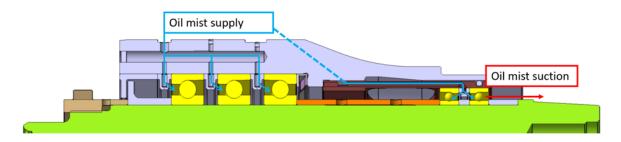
Oil mist lubrication method, oil mist supply is colored in blue and suction due to compressor vacuum is marked with red arrow
